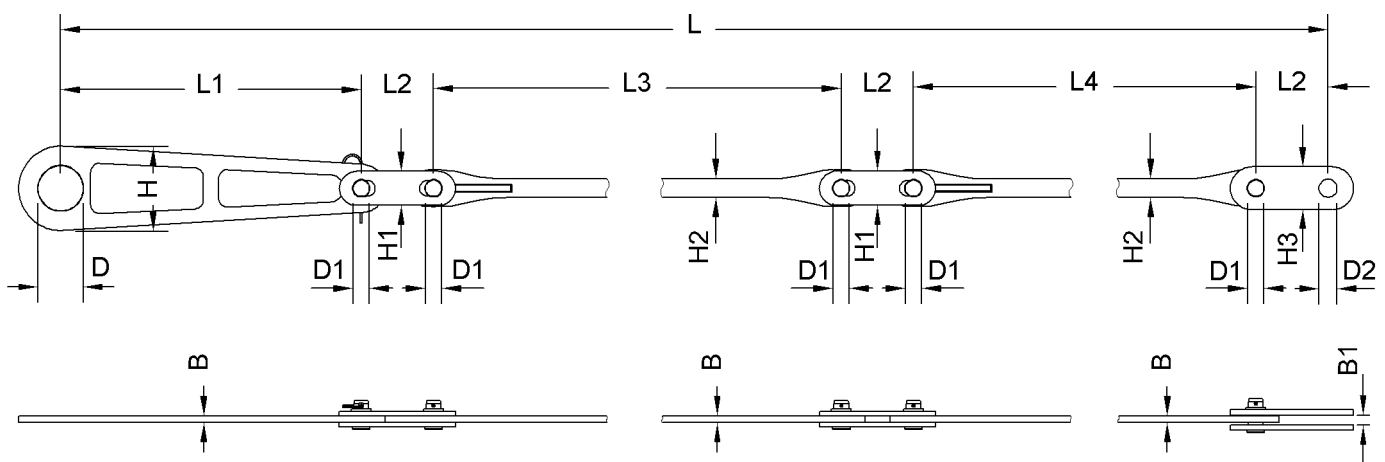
Jib pendant strap dimensions (A-frame 2 to 0906 jib head)
